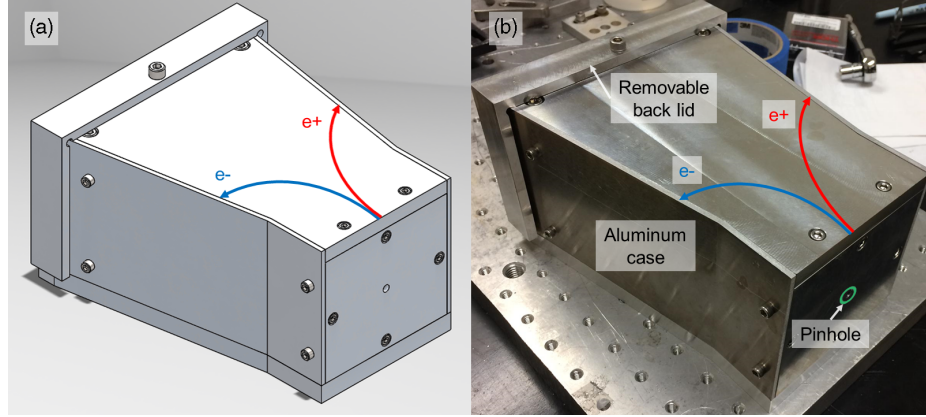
(a) A CAD model of the complete GSPEC assembly. (b) Following the specifications of the CAD model, the GSPEC was manufactured in the UT Austin Physics Machine Shop. The enclosure consists of a light-tight aluminum case, removable back lid, and front pinhole. In both images schematic trajectories of electrons and positrons are visible.
